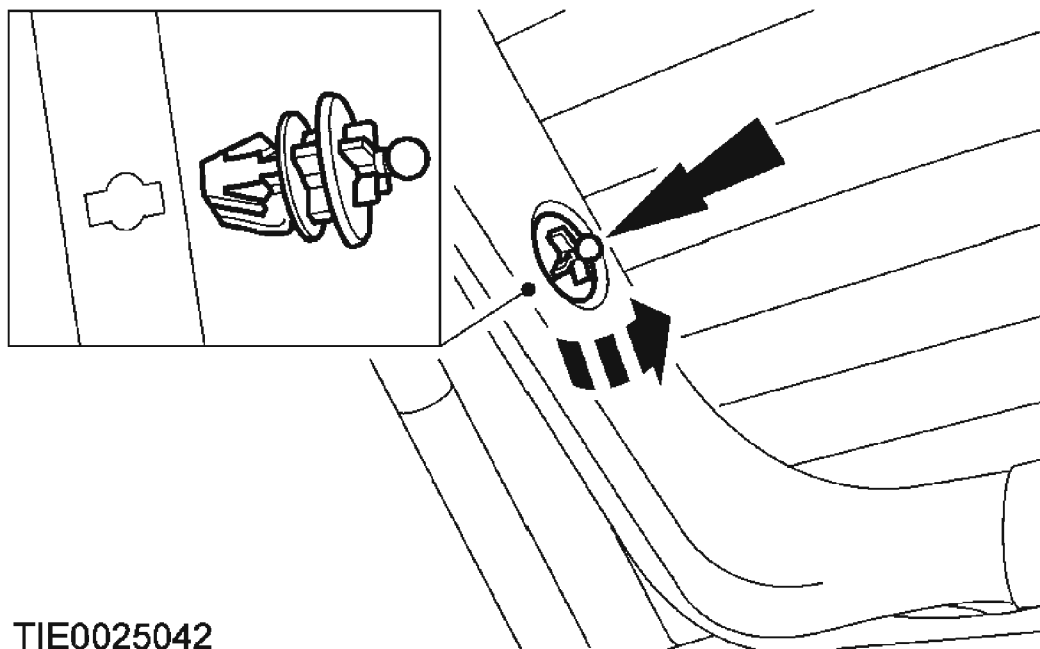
Removing Rear Window Wiper Motor Spindle Grommet
